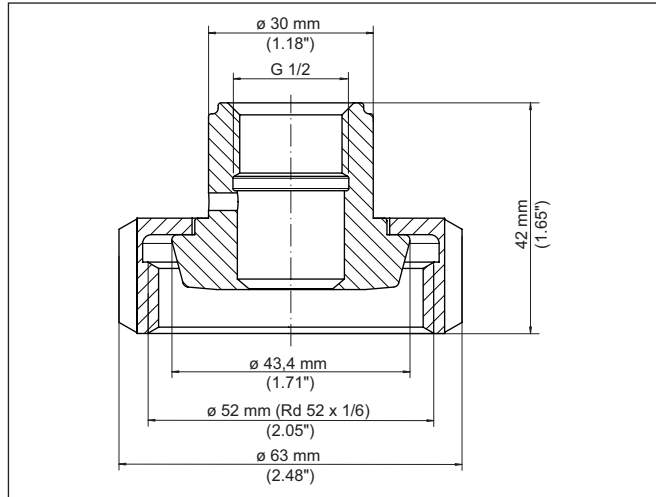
Dimensions hygienic adapter G $\frac{1}{2}$ (DIN 3852-X) on slotted nut DN 25 (DIN 11851) PN 40 - Cone seal
